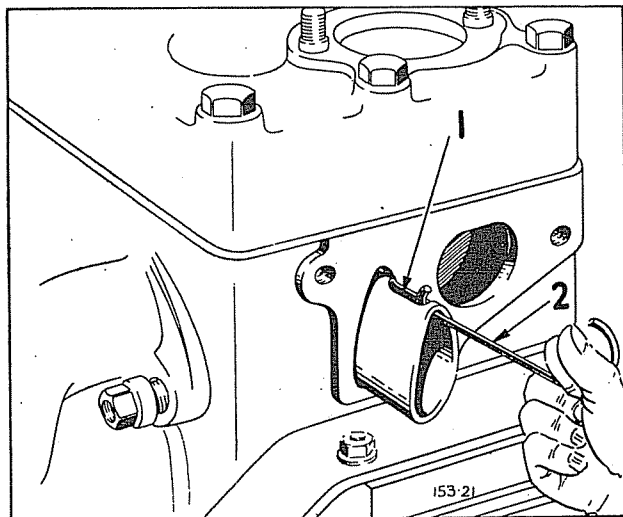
Removing Cylinder Block Water Distributor Tube.
